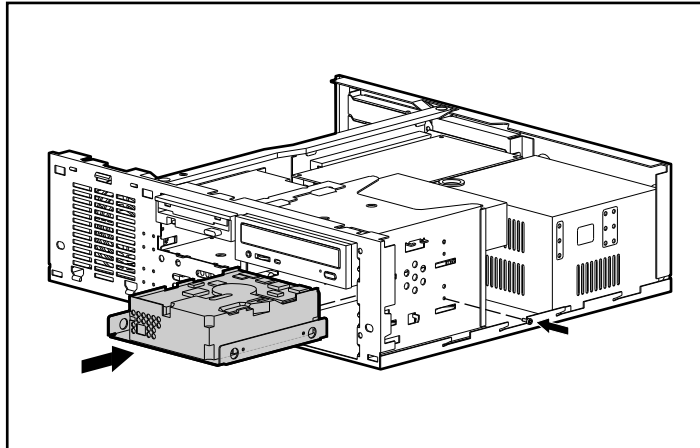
Attaching a 3.5-inch drive to a 5.25-inch bracket
